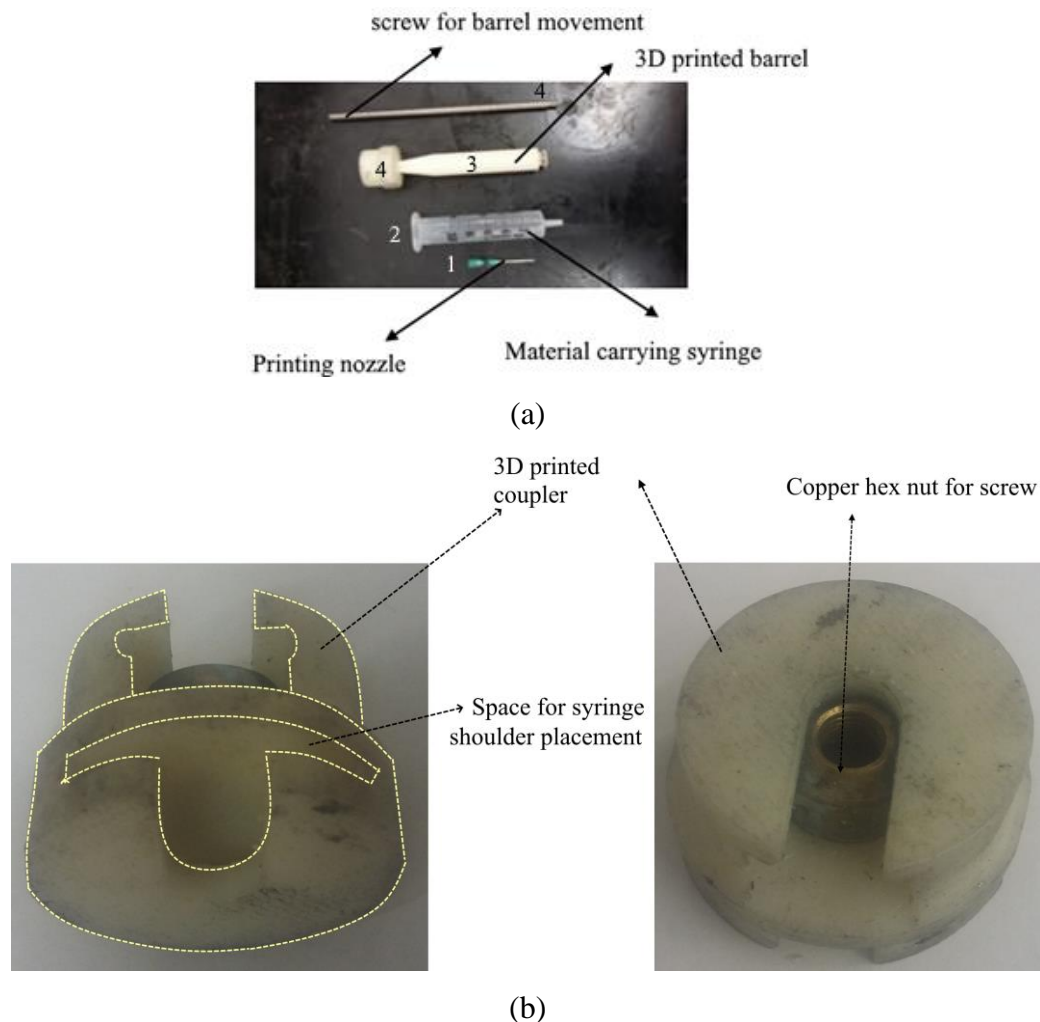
(a) The syringe-plunger system is shown for the printing system with its components that are used to carry material for the sake of dispensing material through the printing nozzle. (b) The 3D printed coupler with a copper hex is presented in this Figure. This was used for joining plunger and long screw for plunger movement for deposition of material through the printing nozzle.
